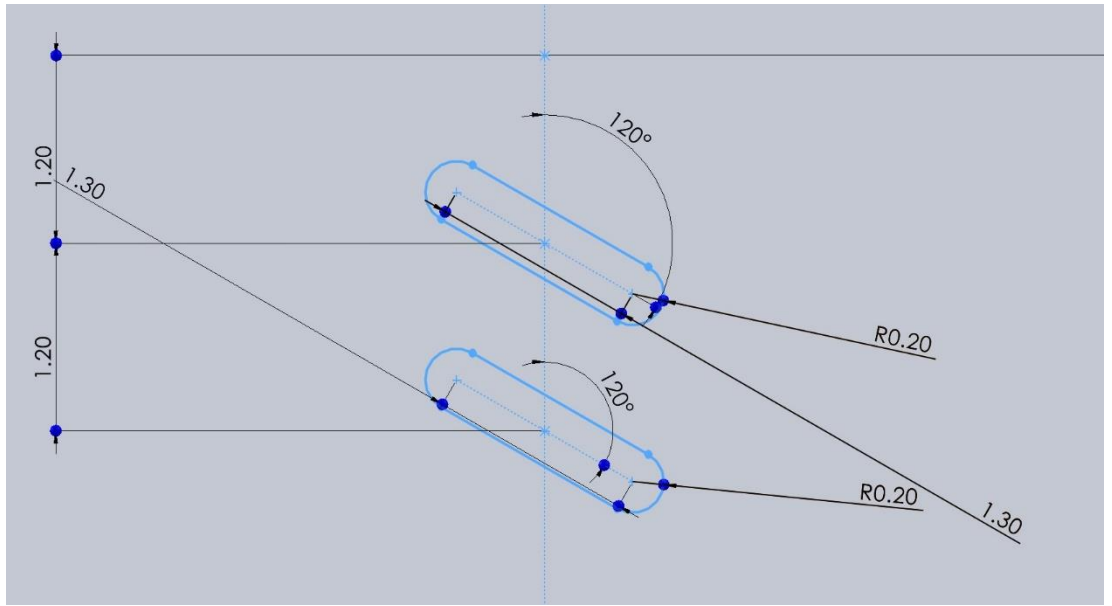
Thread Morphology: Cutting thread (modified V)
